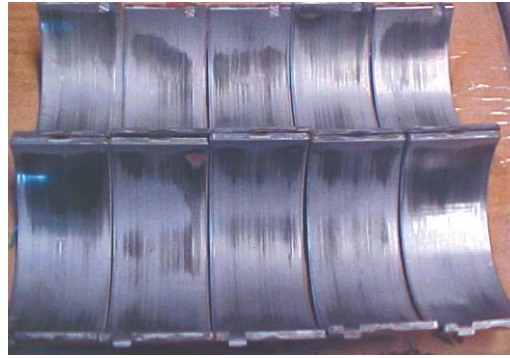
Marks of contact between crankshaft and bearings
